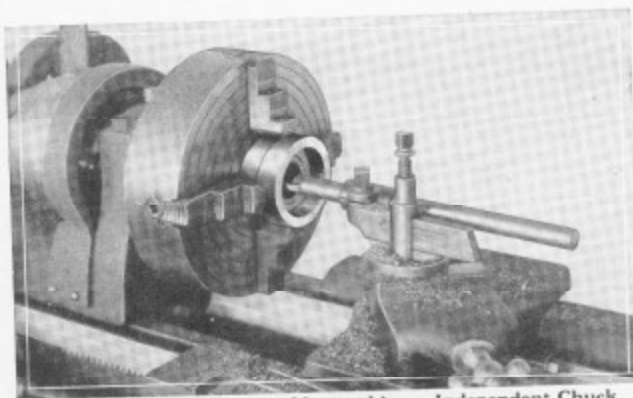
Boring a Bushing Mounted in an Independent Chuck
